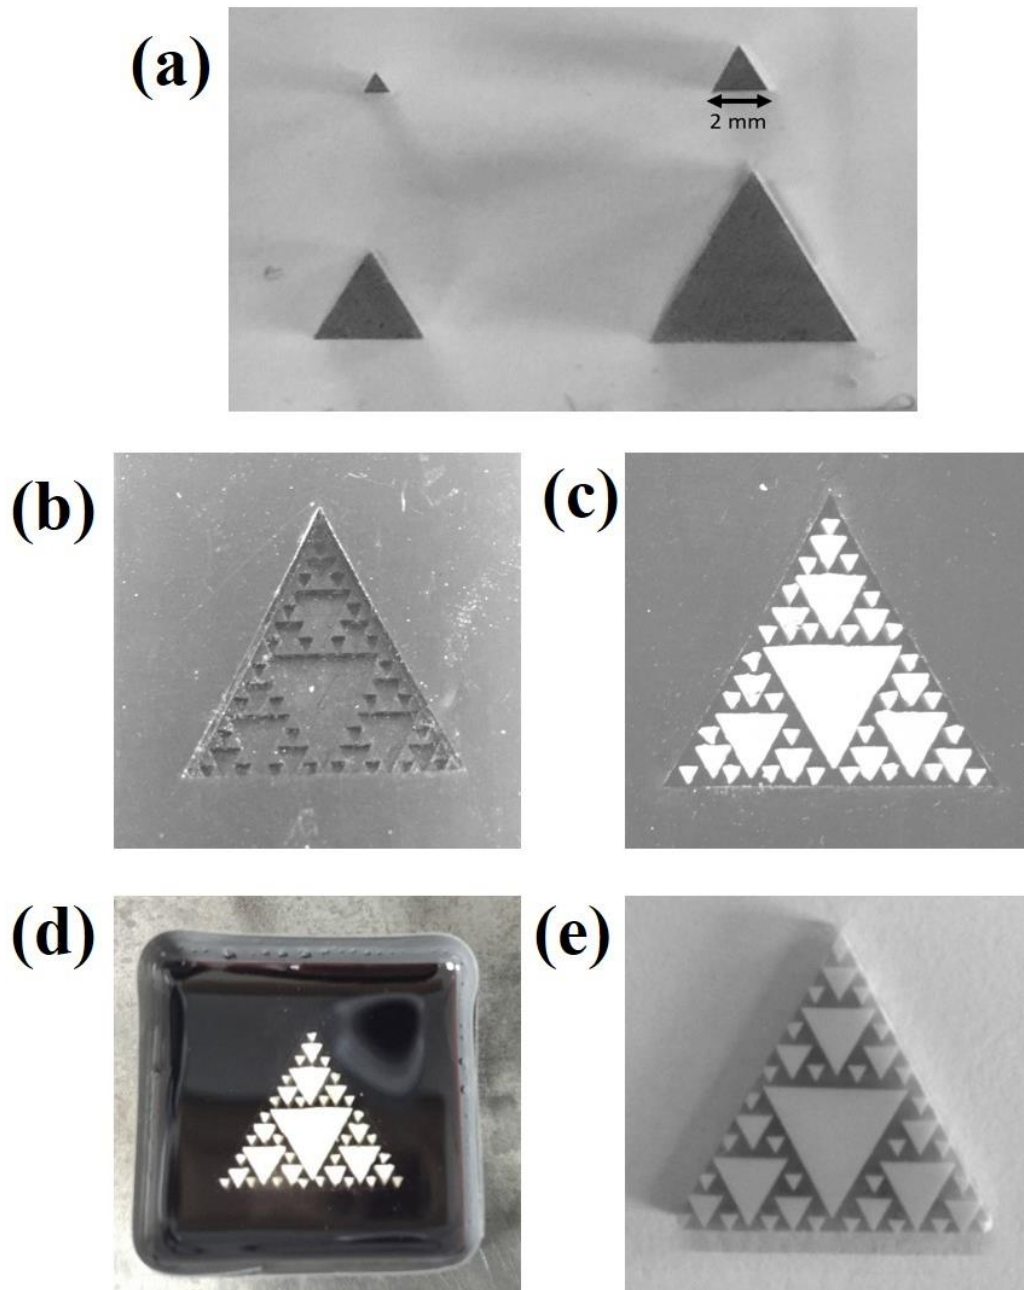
SG fractal composite fabrication process: (a) individual cut ceramic pillars with different sizes; (b) 3D printed mould; (c) ceramic pillars are placed in the mould; (d) the mould is filled with polymer; (e) the surplus mould is machined off.
